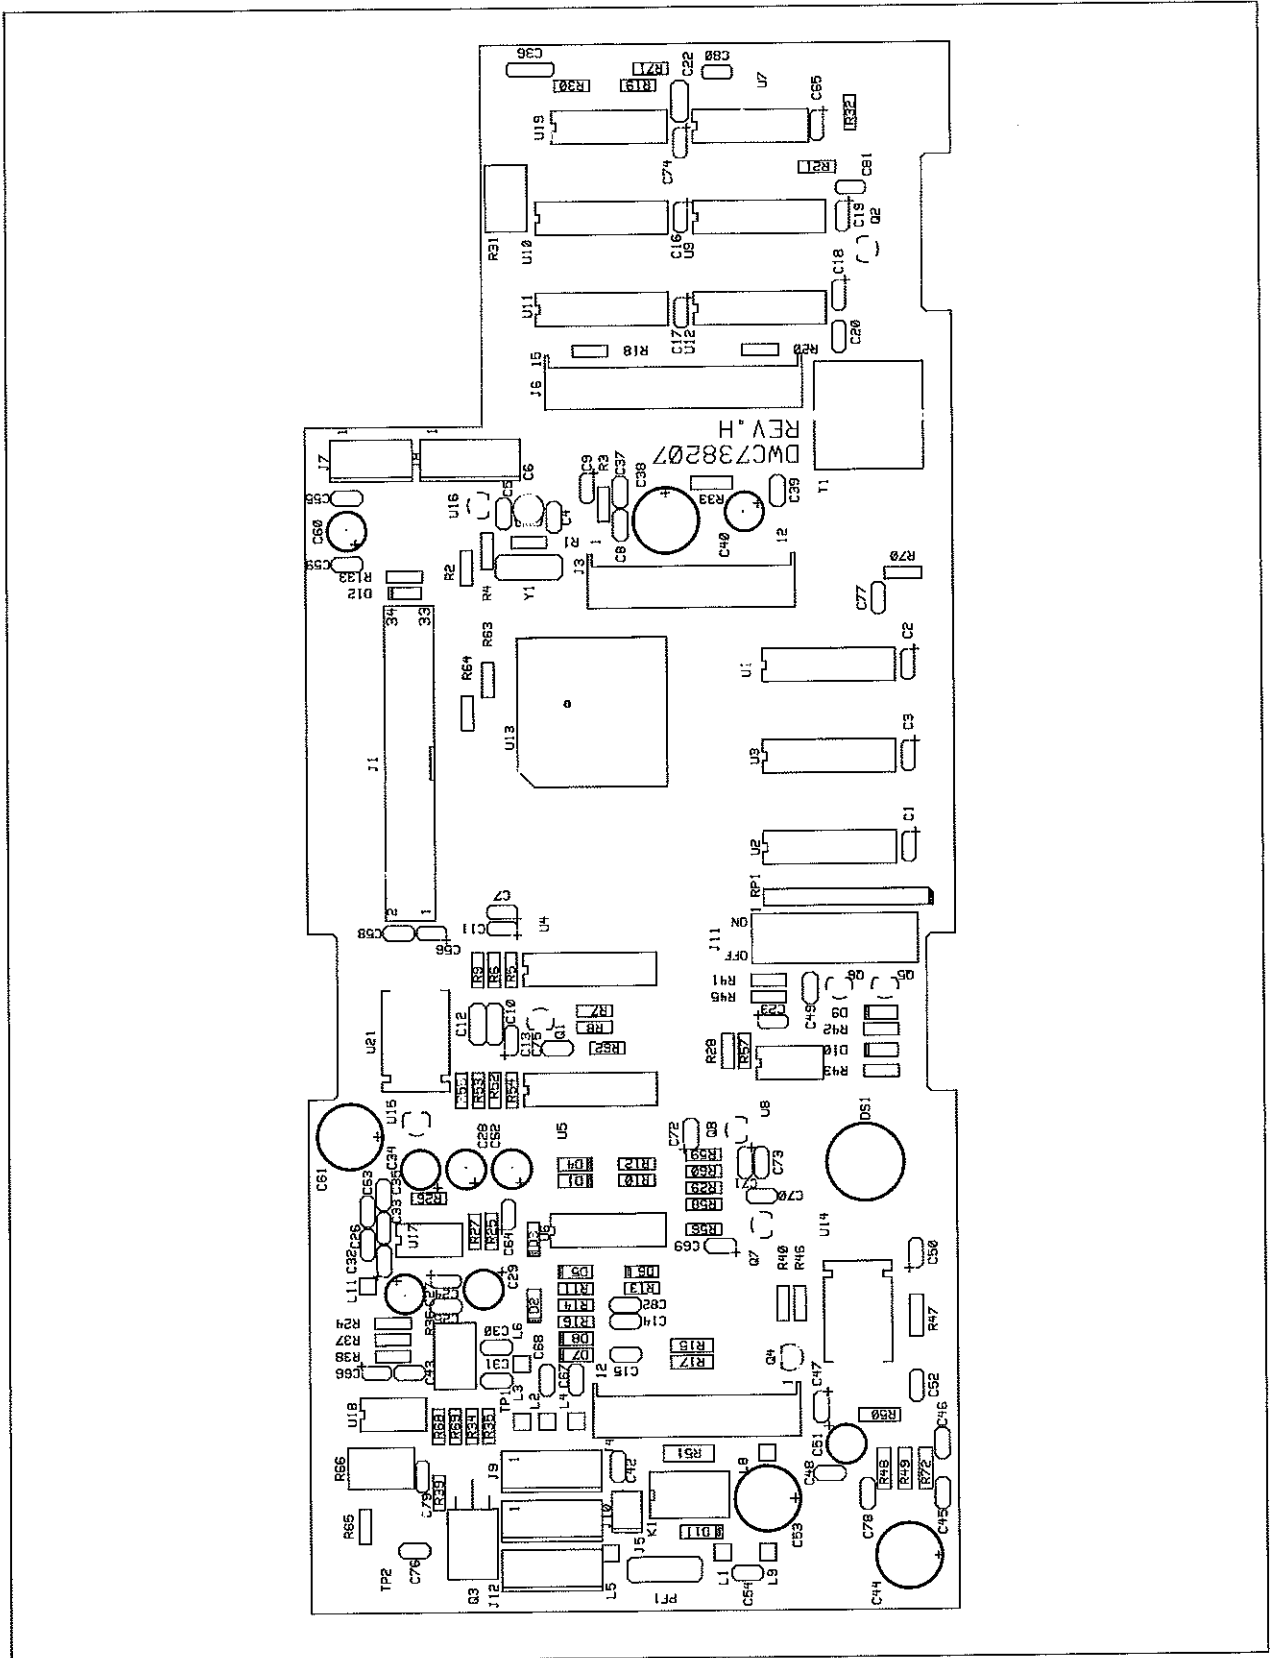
Front Panel Assembly Component Locations (738207 Rev. J)
